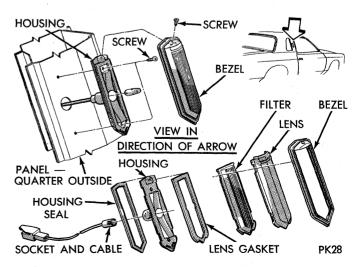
"B" Post Opera Lamp—Carlines S and F without Halo Moulding
